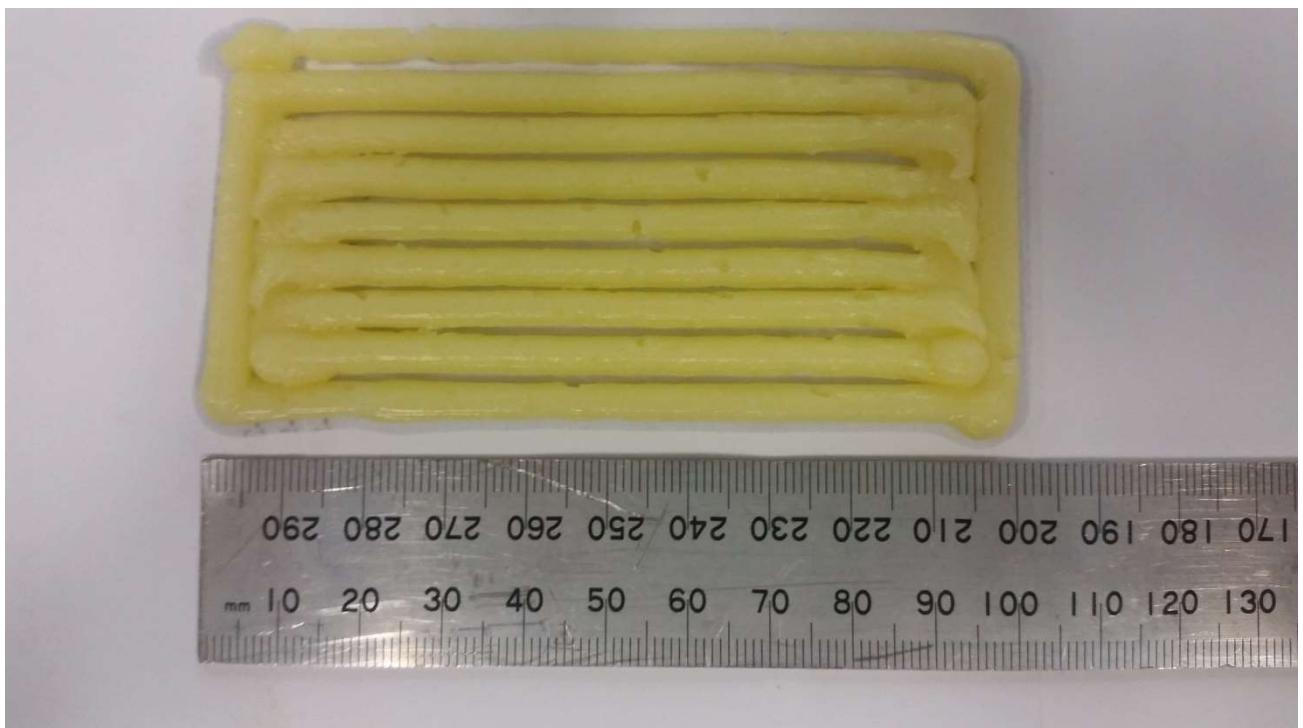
Rectangle Horizontal Deposition Layer Length measurement
